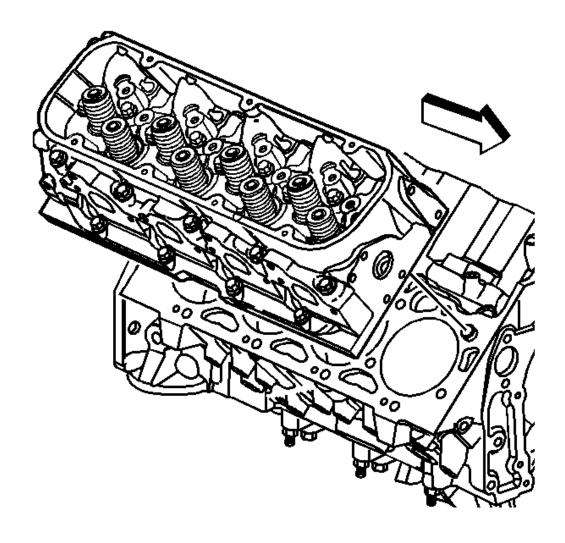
View Of Right Cylinder Head And Alignment Pin Courtesy of GENERAL MOTORS CORP.
